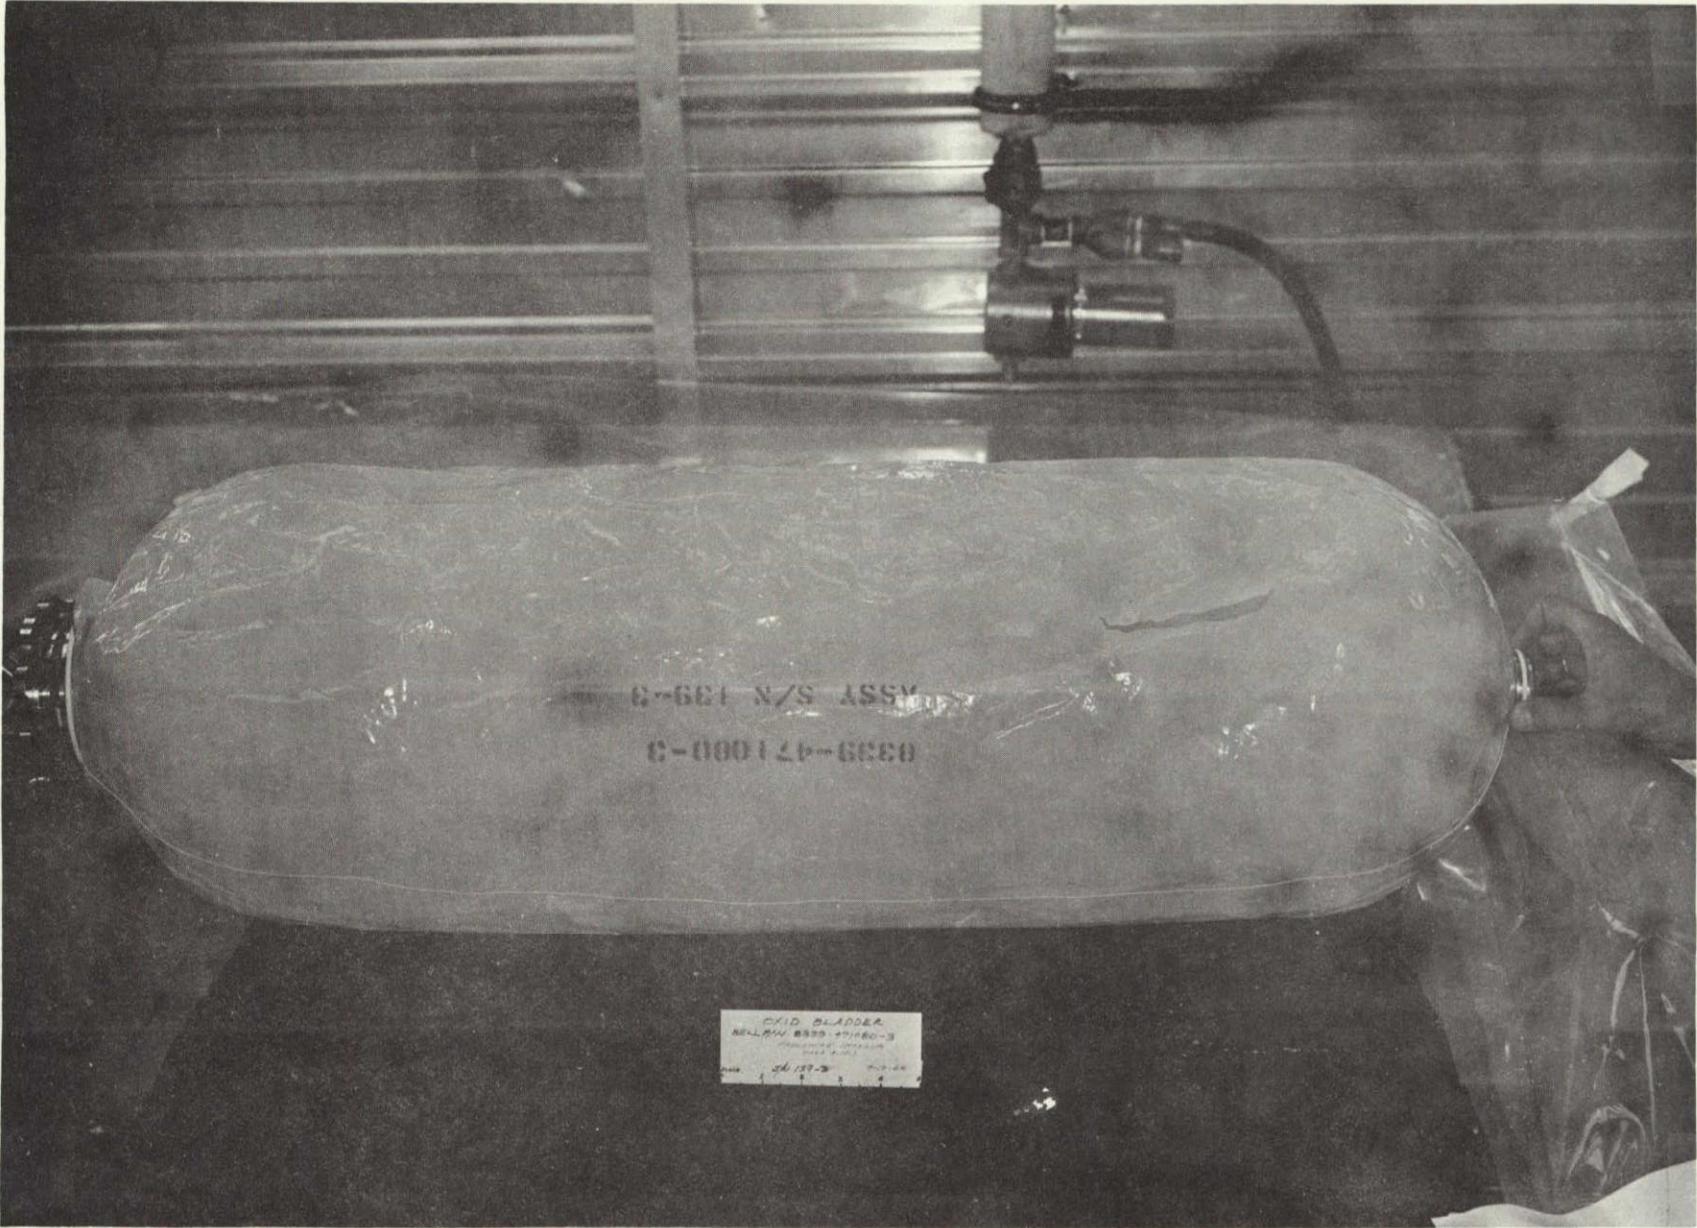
Oxidizer Bladder (Sheet 1 of 2)
